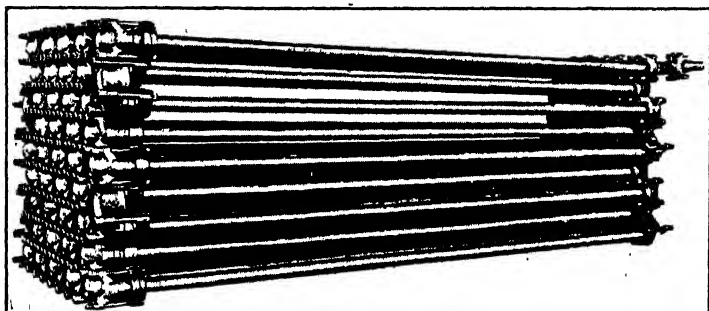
ASSEMBLY OF TUBES AND RETURN BENDS FOR A PIPE STILL
